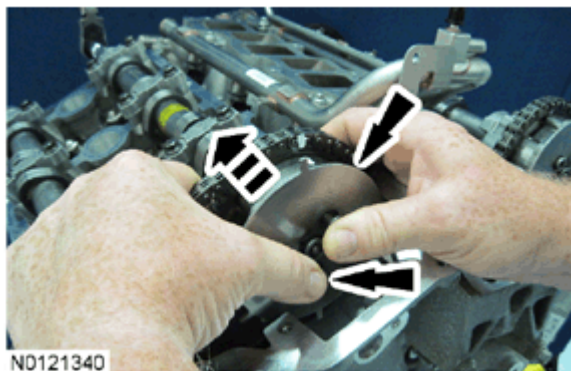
Pressing RH Camshaft Phaser And Sprocket Bolts Towards Rear Of Engine
